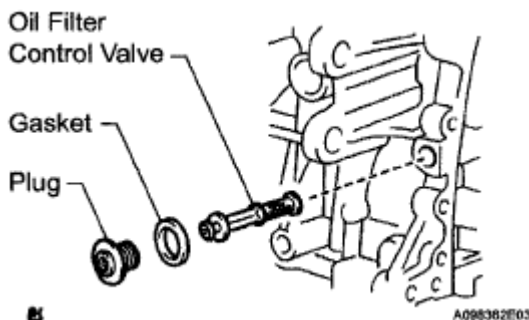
Identifying Control Valve, Oil Filter And Plug
